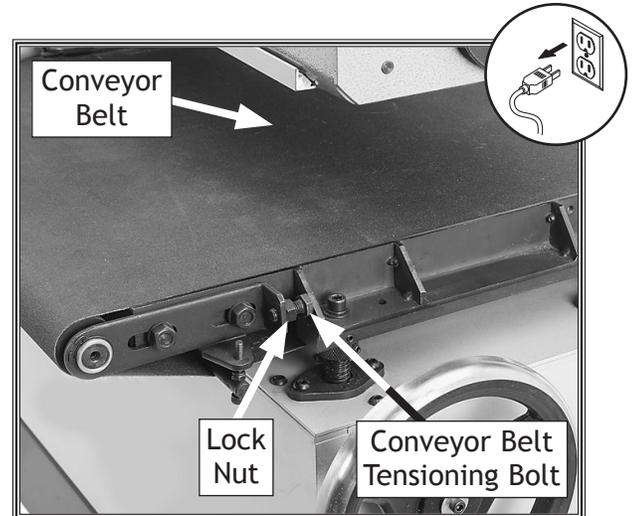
Conveyor belt tensioning controls (outside of table shown).
